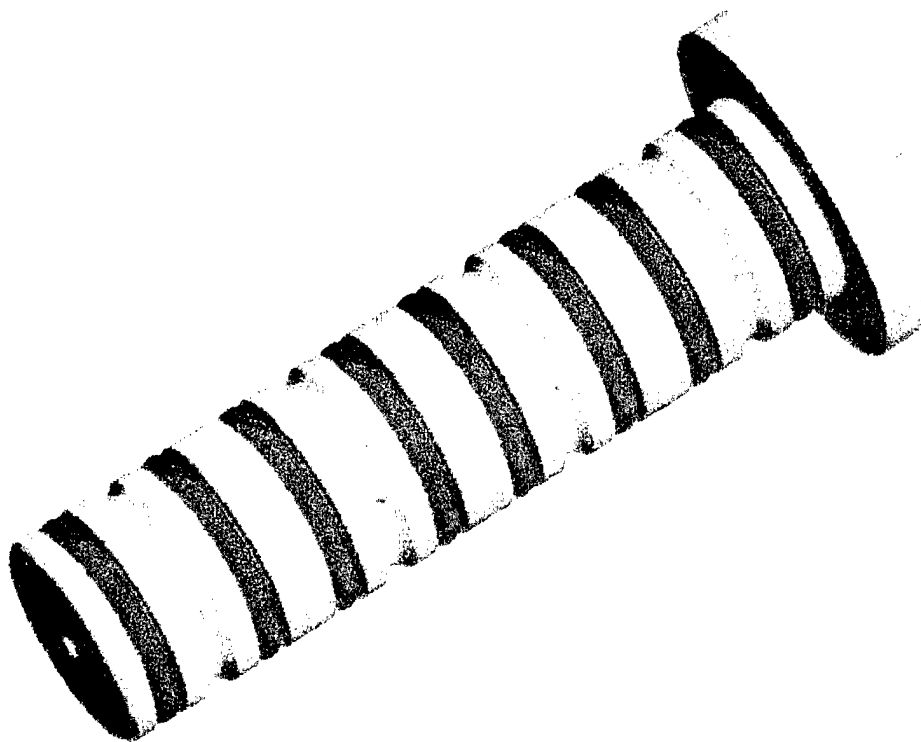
Test Fixture for Aging of O-Ring Seals
